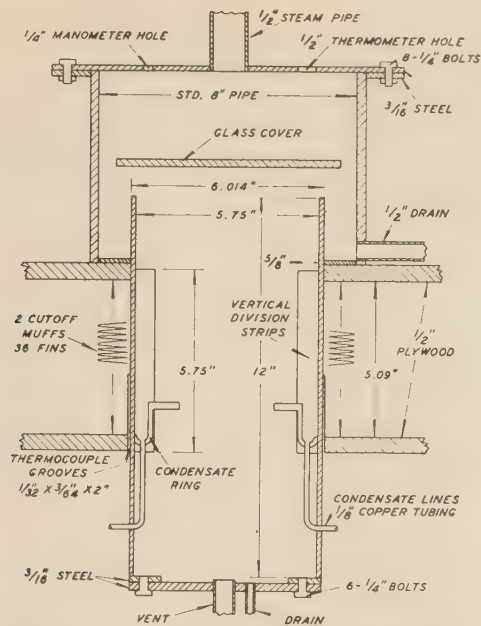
SECTIONAL ELEVATION OF TEST SECTION
